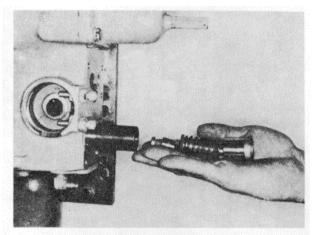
G-55. Removing Spring Pack Assembly of VS Pump
